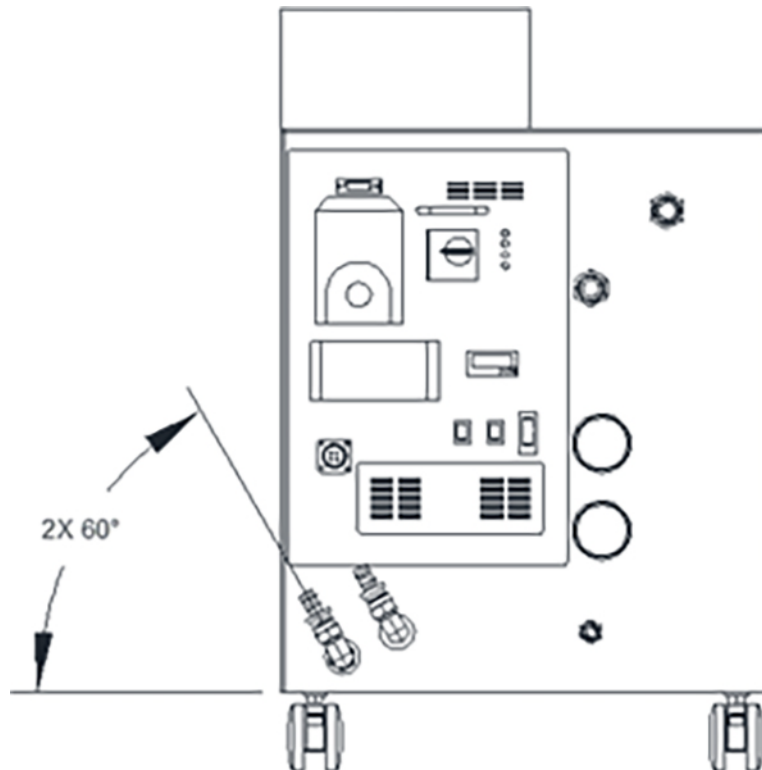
Cryogen compressor cooling jumper connection removal
